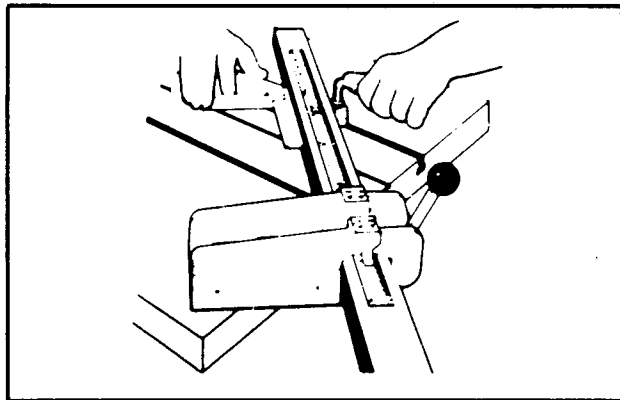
UNIVERSAL CALIBRATED WORK FIXTURE SET UP FOR ANGLE CUT-OFF.
